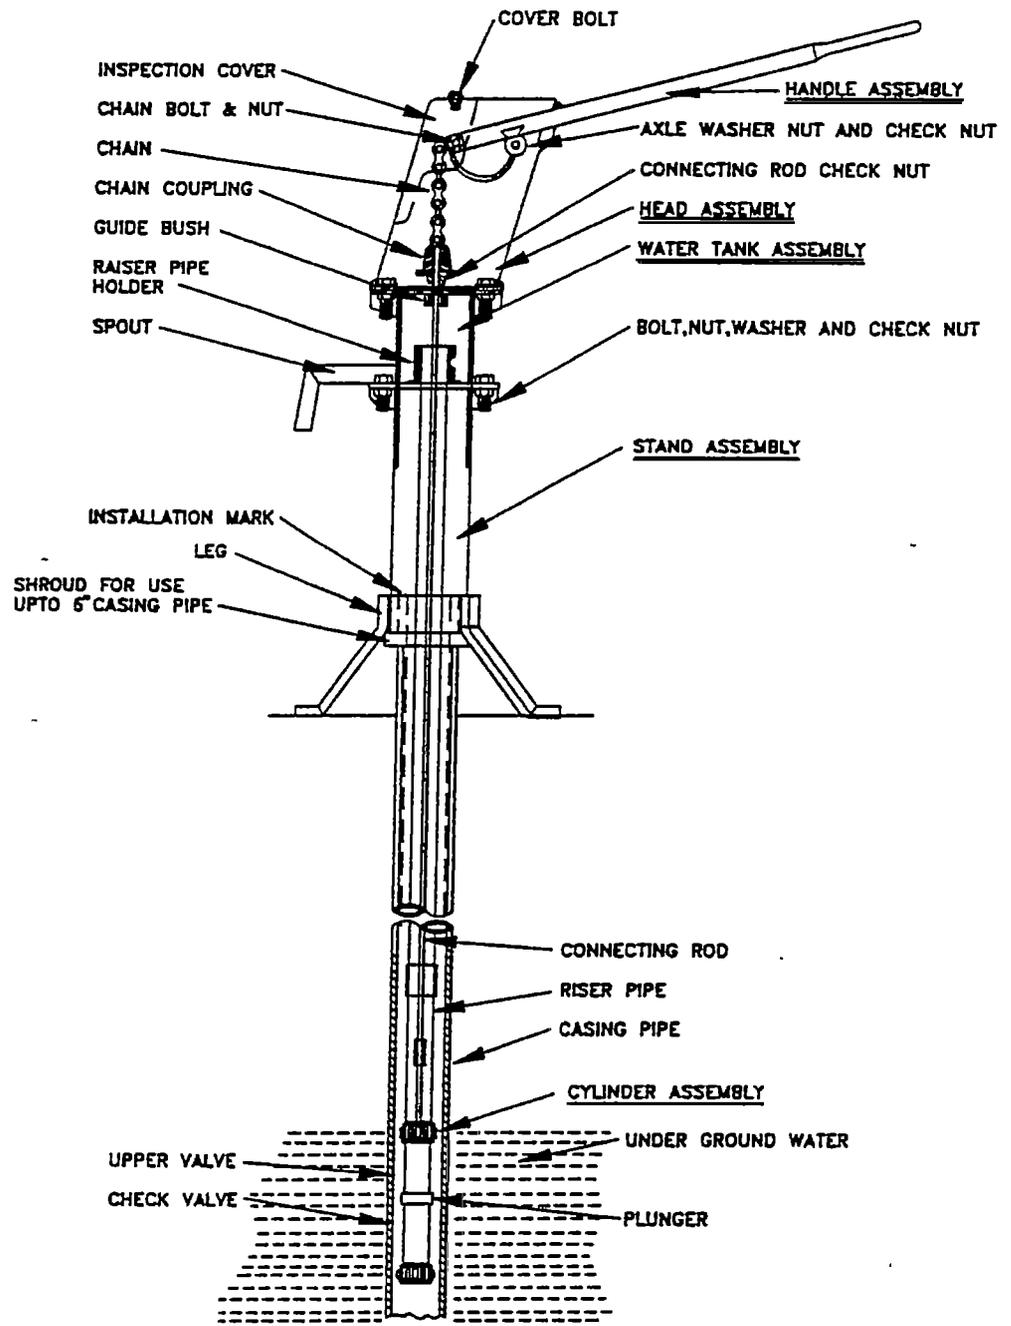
DETAILS OF HAND PUMP ASSEMBLY
